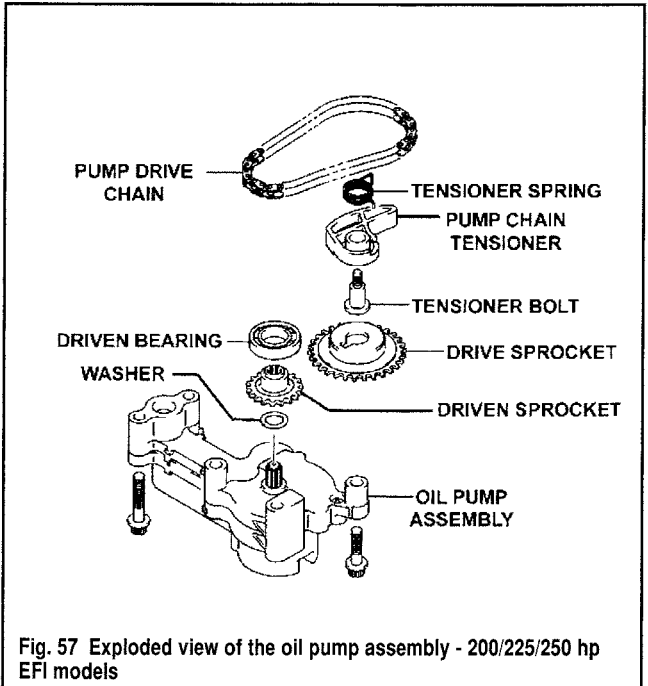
Exploded view of the oil pump assembly - 200/225/250 hp EFI models
